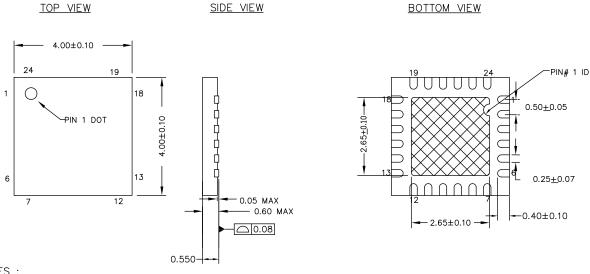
24-pin QFN EPAD (Sawn) Package Outline
